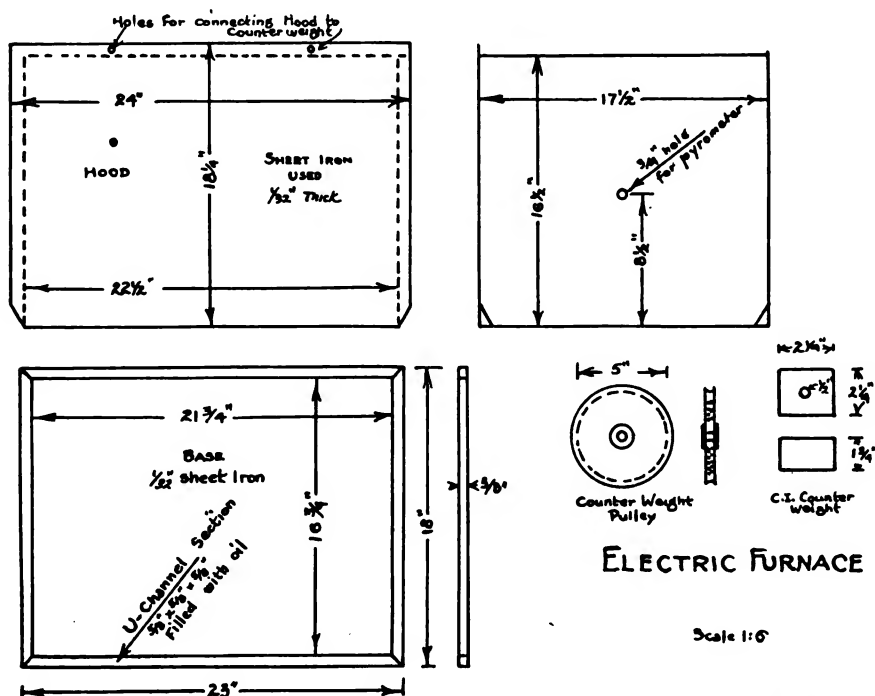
THE HOOD FOR THE FURNACE SHOWING DIMENSIONS AND FITTINGS
